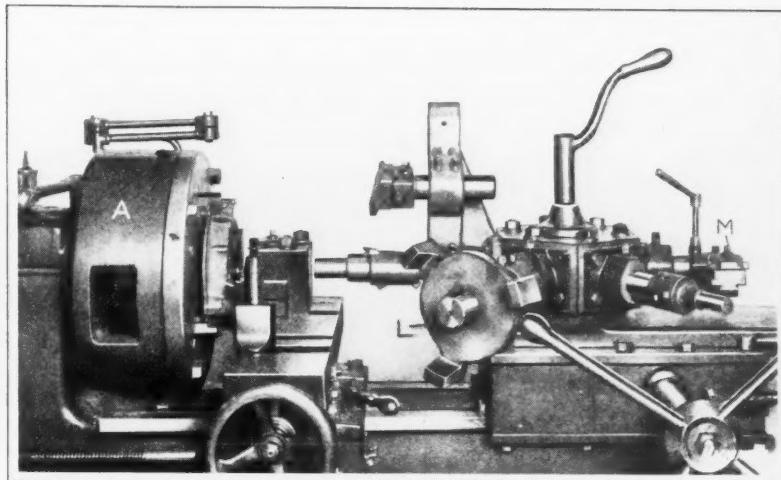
Arrangement of Special Chuck and Tools used for finishing a Thin-walled Brass Casting on a Turret Lathe
